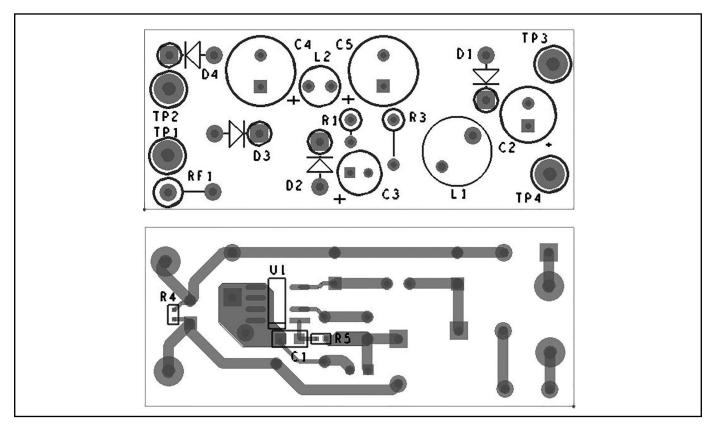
Recommended Printed Circuit Layout for LinkSwitch-TN2 using D Package.
